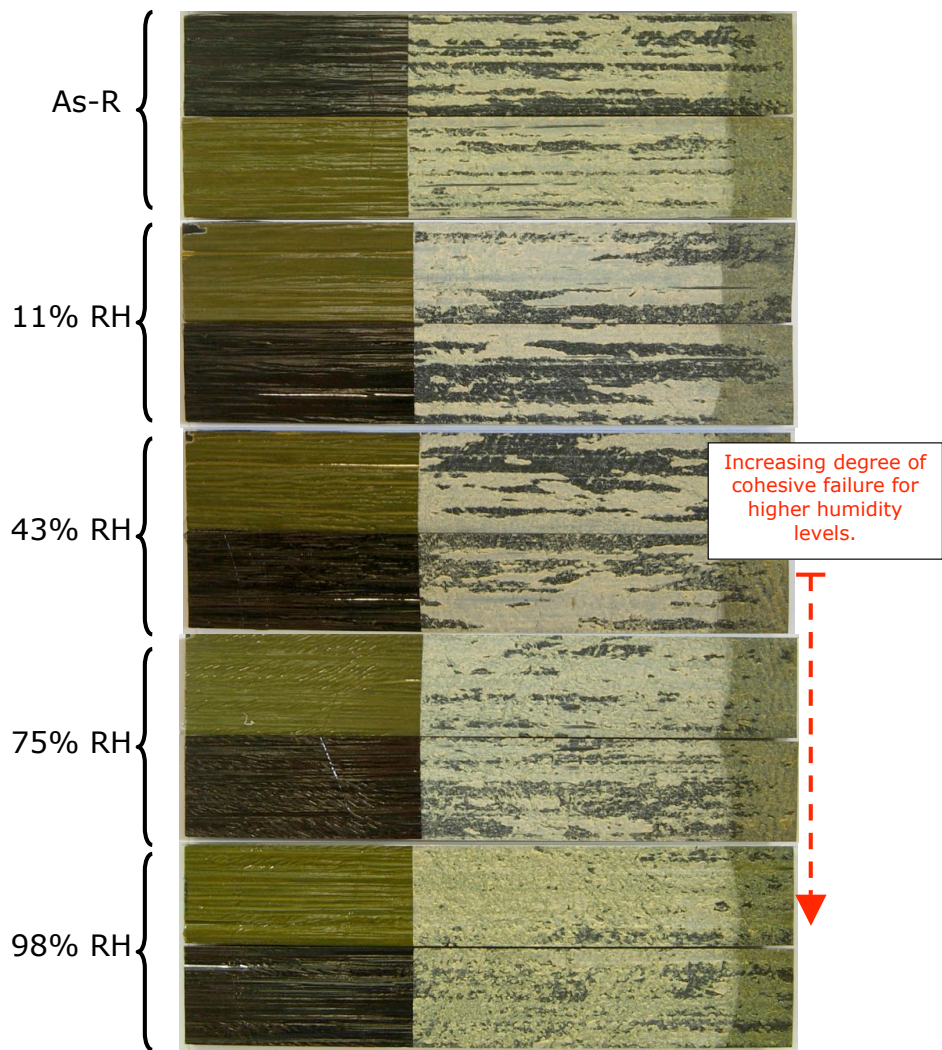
Fracture surfaces of Mode I DCB test.
